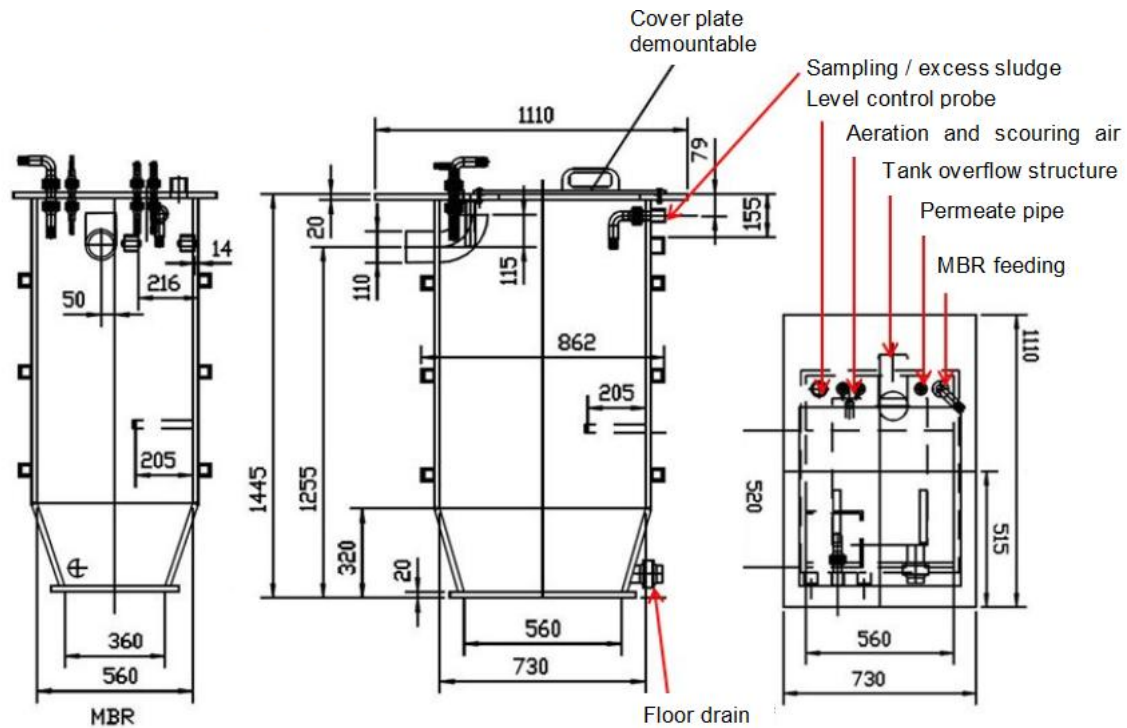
Technical drawing of MBR tank; (HUBER SE, 2011a)
